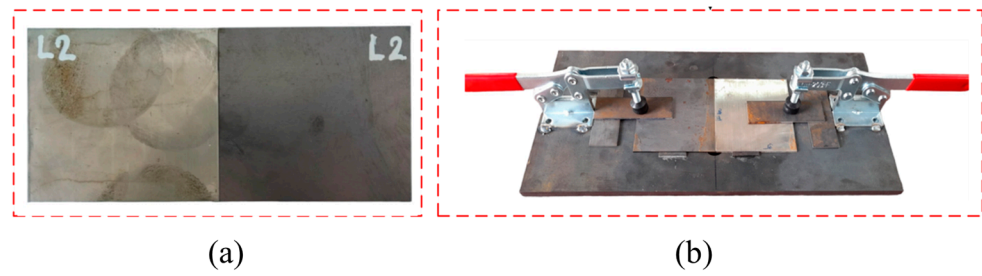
Workpieces fixed on the technological jig. (a) C20 and SUS201 samples, (b) fixture with clamp.
